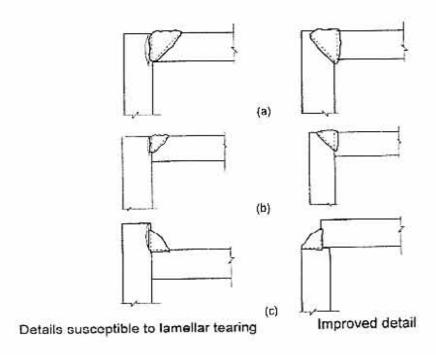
Improved Welded Connections to Reduce Lamellar Tear
